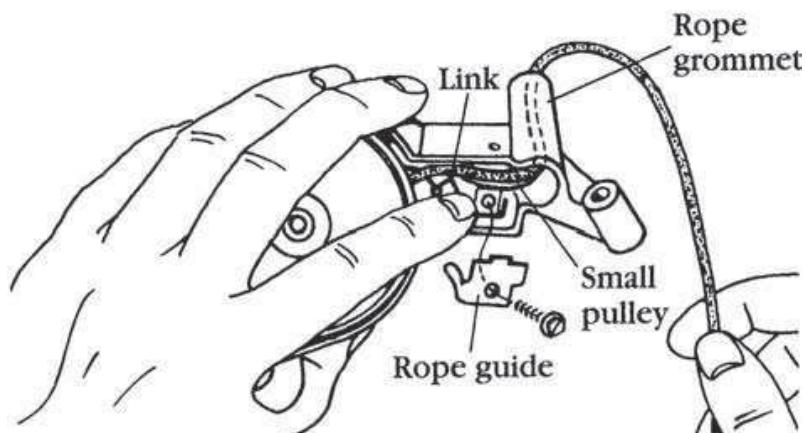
Observe the position of the friction link before disassembly. Briggs & Stratton Corp.
